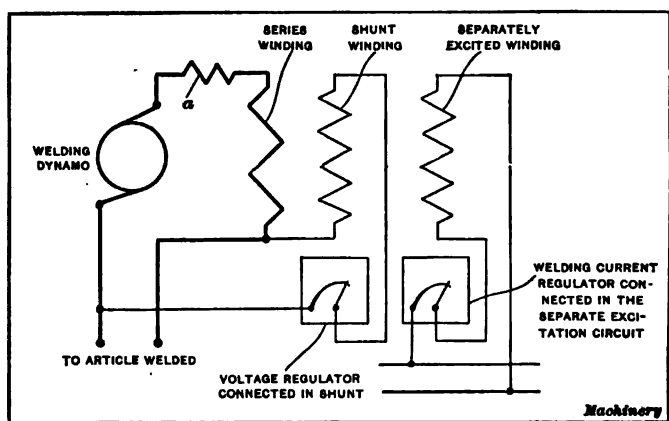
Wiring Diagram of Kramer Electric Welding Machine
